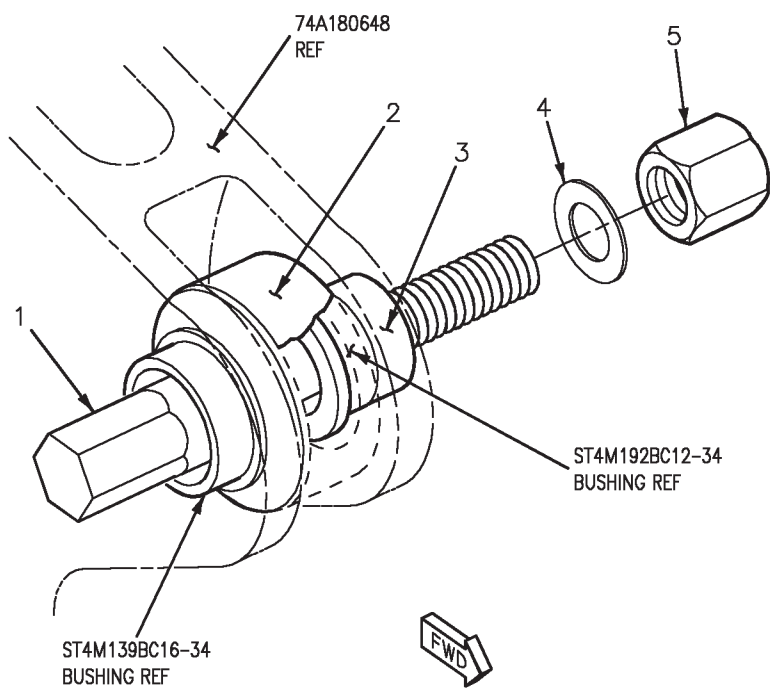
Bushing Removal, Installation, and Reaming (Sheet 10)
